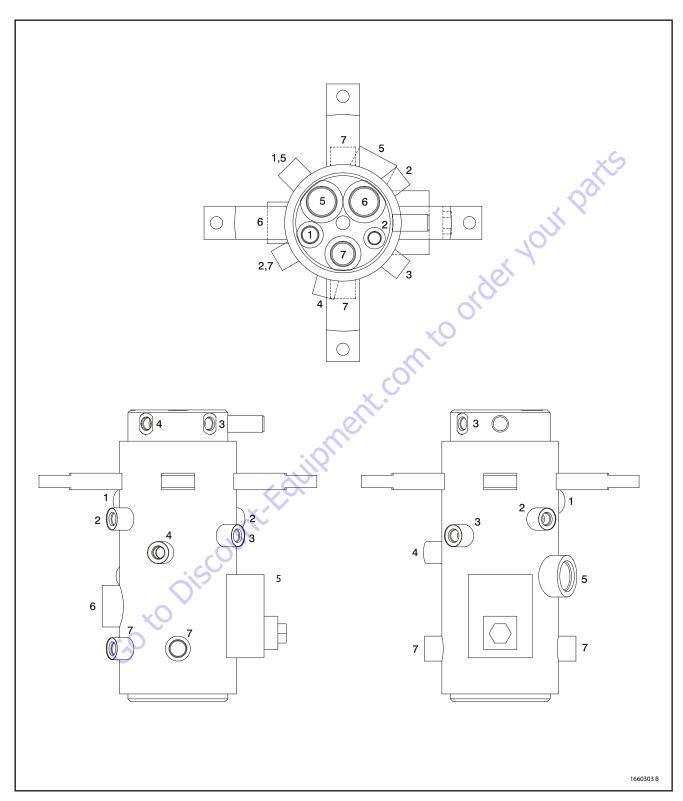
Rotary Coupling Port Location (7 Port) - 2WS (USA Built Machines, SN 0300087000 through 0300138728)
